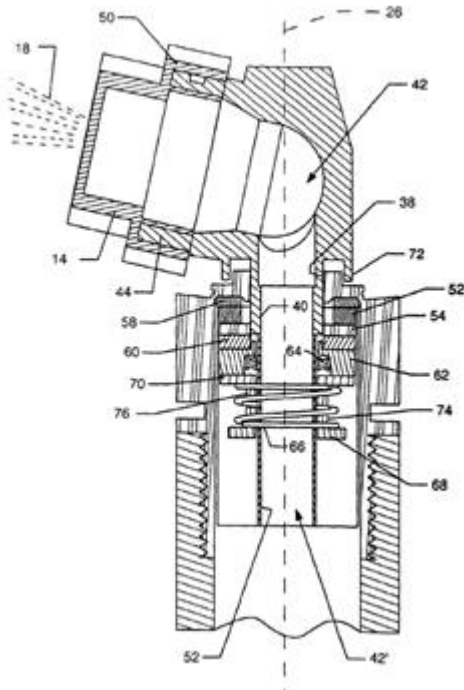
illustrates fluid passing from (42') into (42) to be sprayed (18), passing axially from the bottom member to that of the nozzle member (14), both elements being jointed to one another via bearing sleeve (40) so that the spray (18) sweeps over a surface due to rotation about central axis (26).
